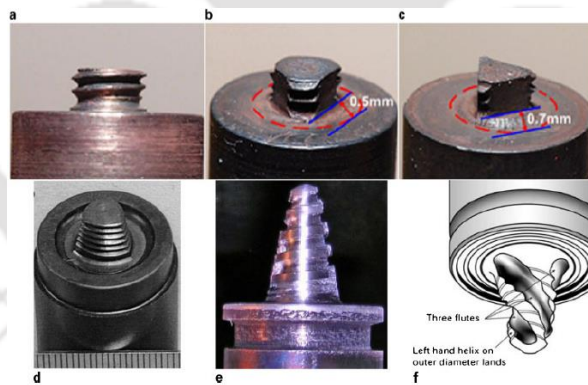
Pin geometries used in FSW tool: (a) cylindrical threaded; (b) three flat threaded (c) triangular (d) trivex (e) threaded conical (f) schematic of a triflute (With permission from Rai et al., 2011. Copyright Taylor & Francis)
